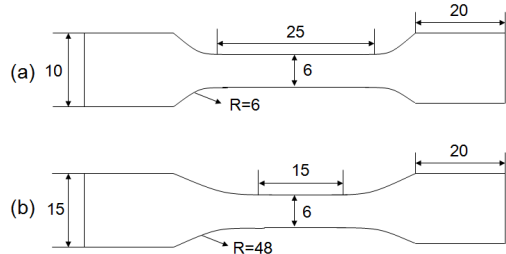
Specimen dimensions of (a) tensile and (b) high cycle fatigue tests
